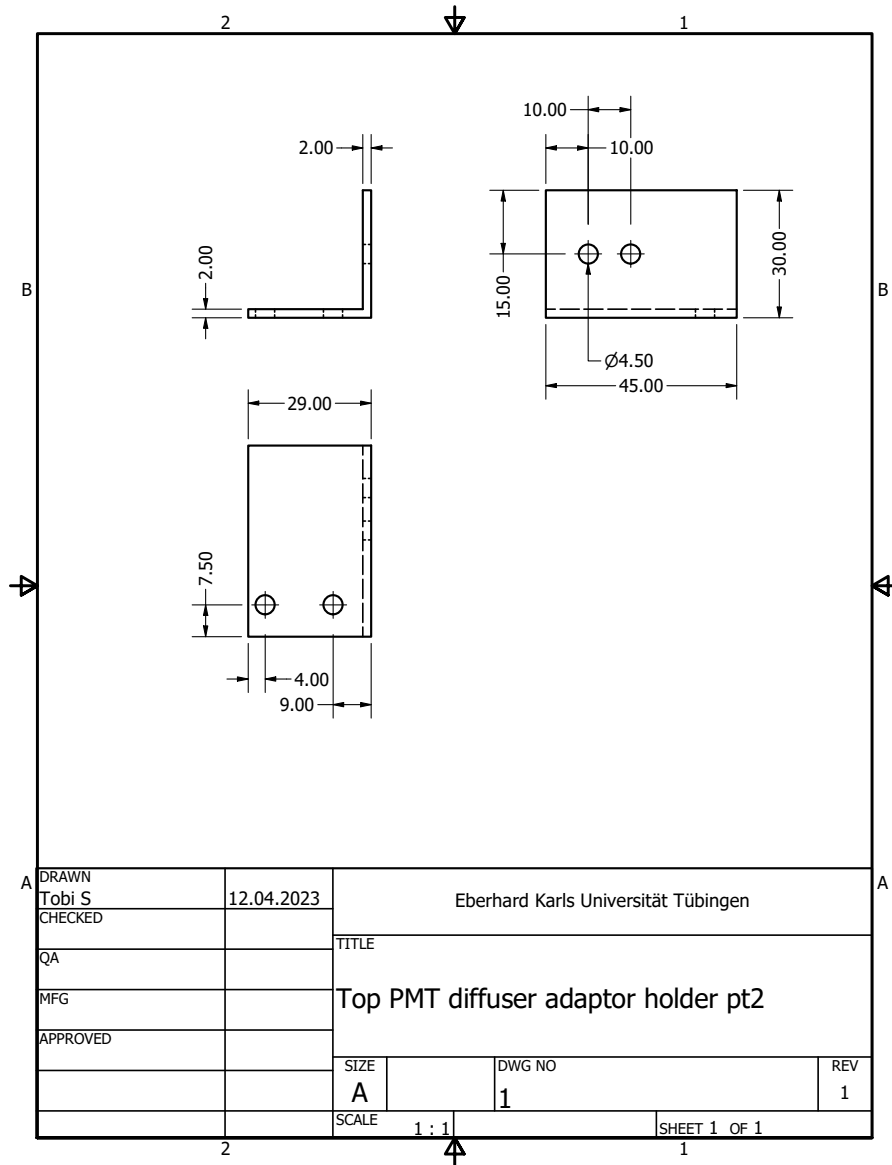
Second part of the diffuser holder adaptor of the diffusers mounted to the PMTs above the AV.
